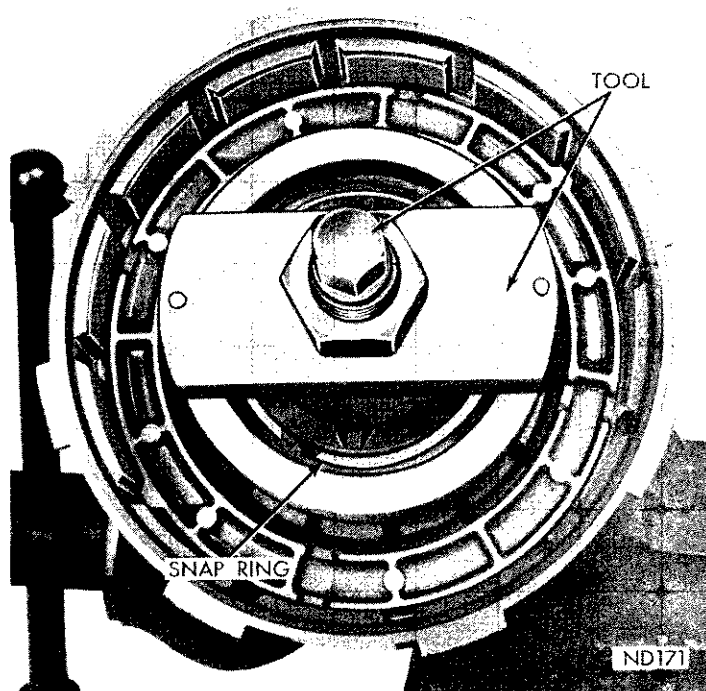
Removing or Installing Front Clutch Retainer Snap Ring (A-727)
